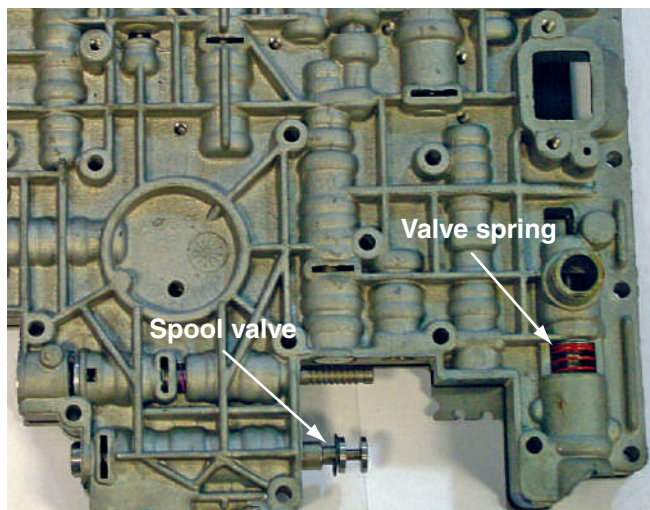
Examples of a spool valve and return spring in a valve body.
